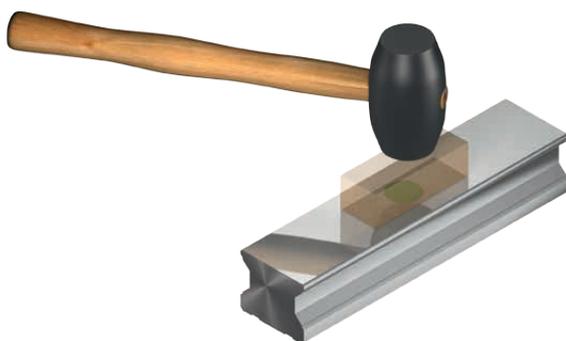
Pressing in of the plastic bolt cap with the help of a press-in block
